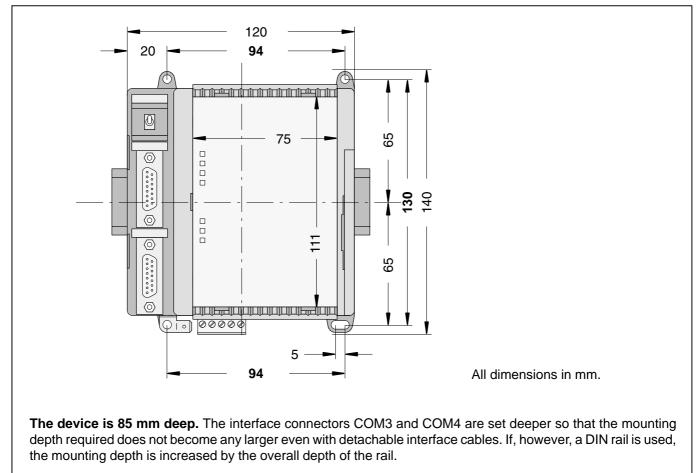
Dimensions of the communication processor module 07 KP 93, front view, the dimensions for assembly bore holes are printed in bold
